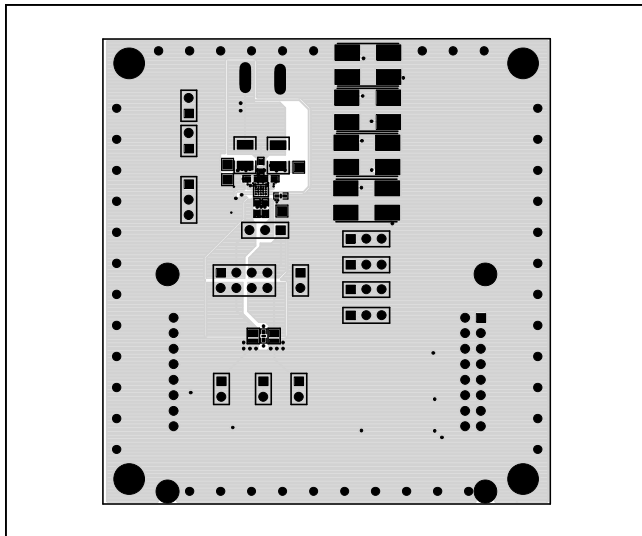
MAX77387 EV Kit PCB Layout—Top Layer
